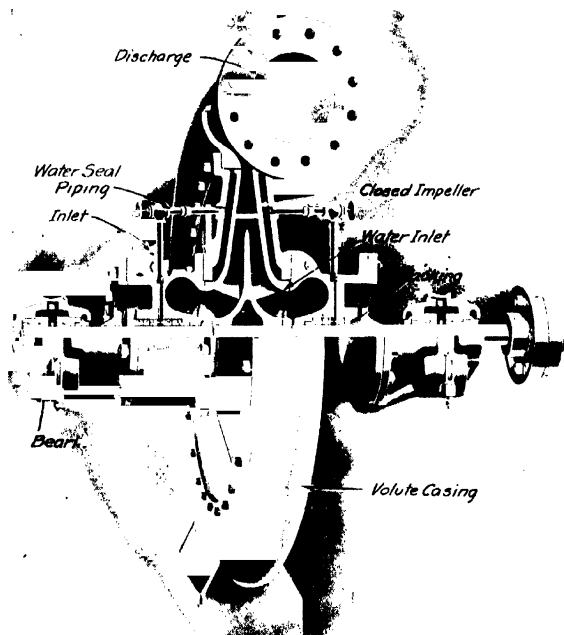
Wheeler Closed Impeller Centrifugal Pump.
